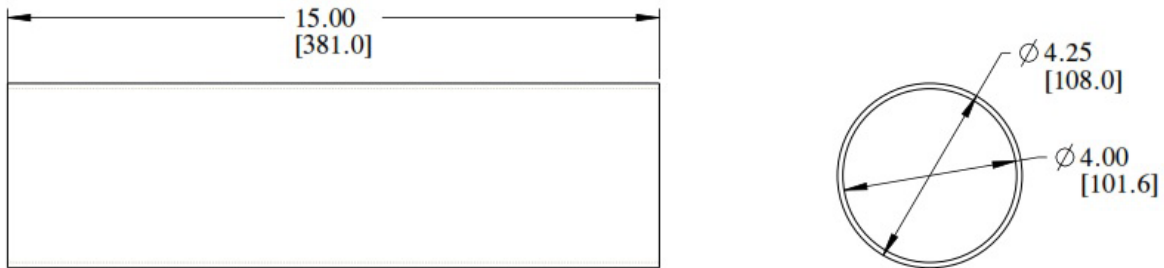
S-3. Dimensioned Drawing of the Draft Tube
